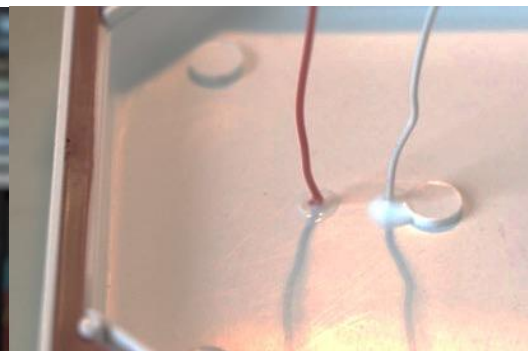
6 PCB Mounts Top View (own illustration)
